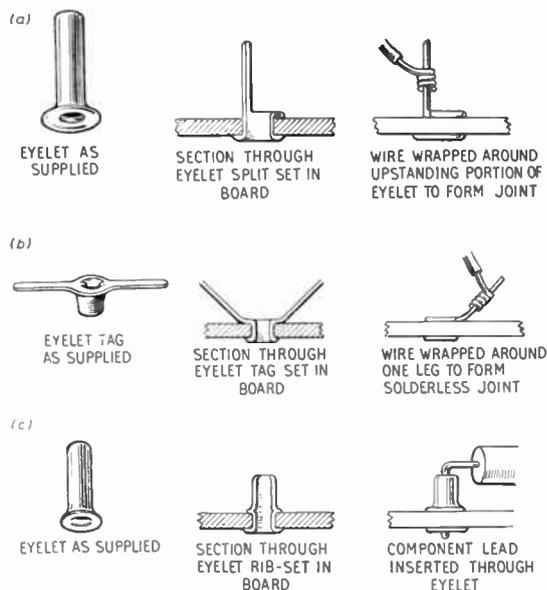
Eyelets and tags for special-purpose applications in construction of printed wiring boards.
